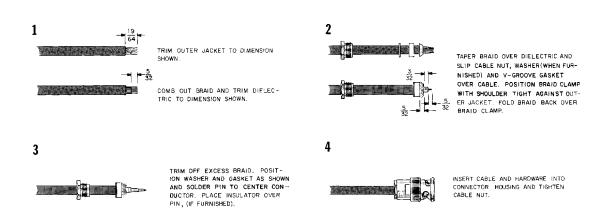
BNC CONNECTOR ASSEMBLY DRAWING
